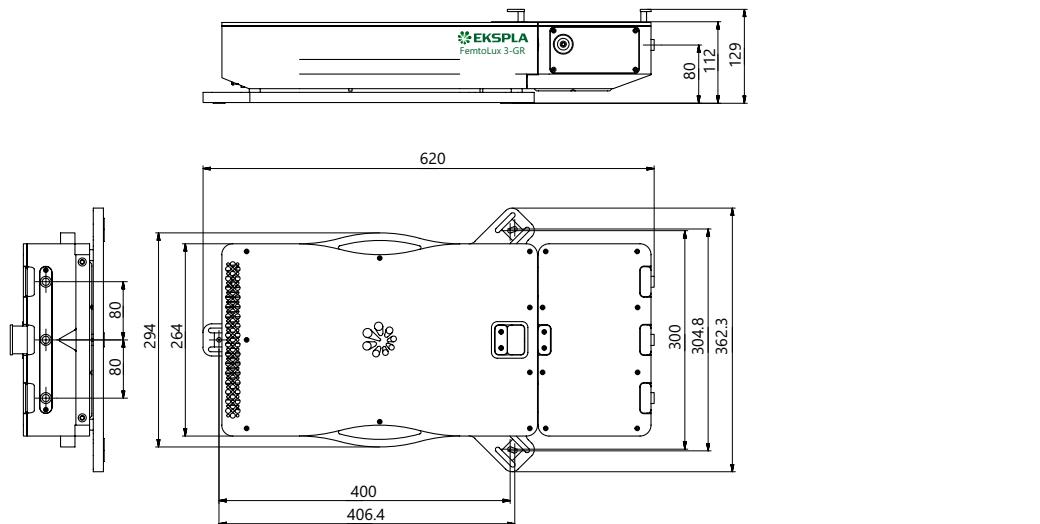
Outline drawings of FemtoLux 3 laser head with second harmonic option
